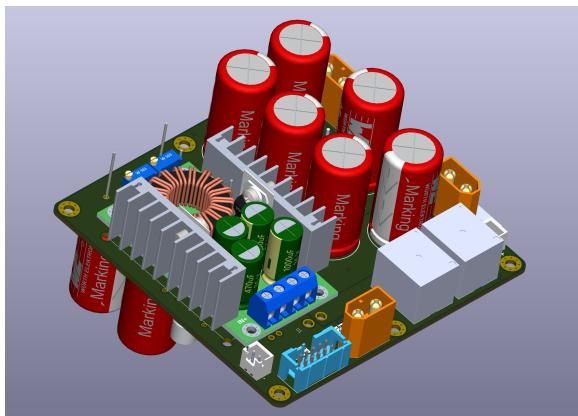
Power Distributor PCB 3D View - Side View 01
